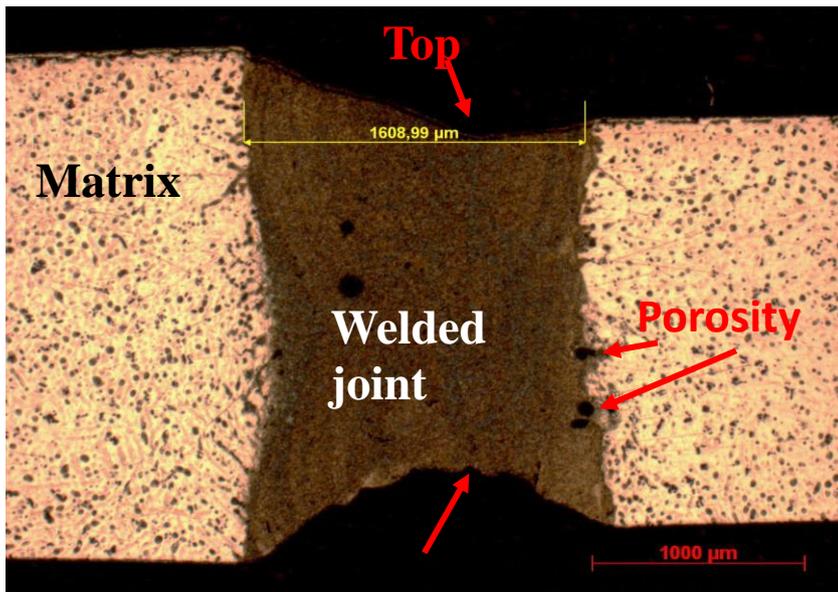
Mg AM 60, TIG Welded Joint, No Filler Material, Cross-section View
